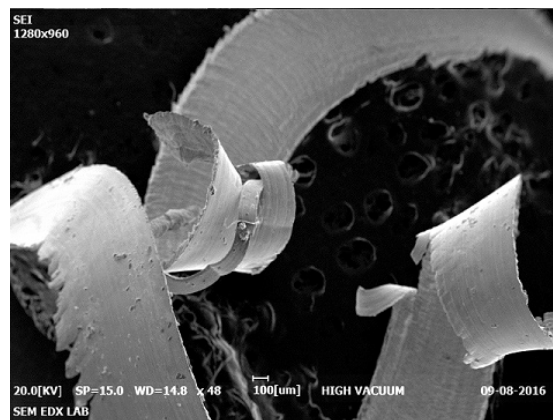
SEM Images of Wet machining with cutting length of 90 mm and machining duration 5 min (cutting speed-70.37 m/min and feed-0.150 mm/tooth)
